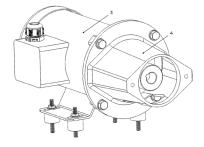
Hydraulic pump (1) / integrated reservoir (2) and Axial Piston Hydraulic Motor (3) / Motordifferential adapter (4) Assembly.
